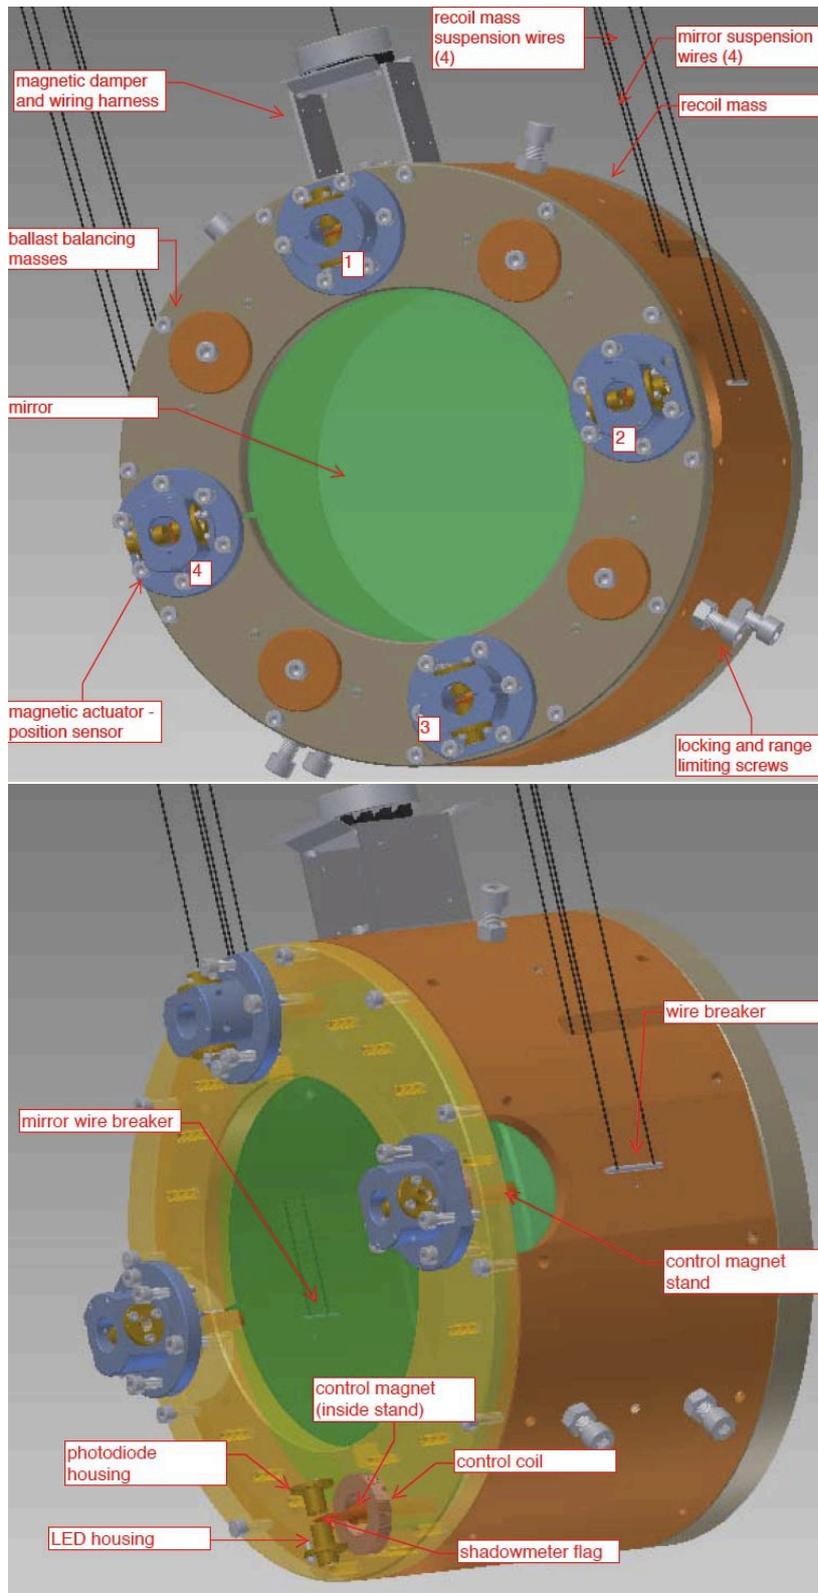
Recycler mirror mounted inside its recoil mass. In the lower image the back plate is made transparent and the body of one of the actuators have been removed for illustration purposes. The wires below the wire breakers are not shown.
